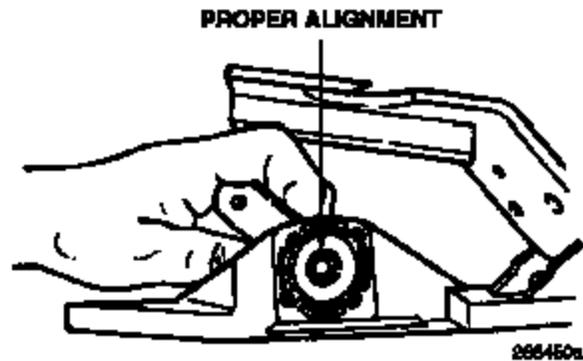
Proper Alignment of Components for Sensor Shaft Installation
